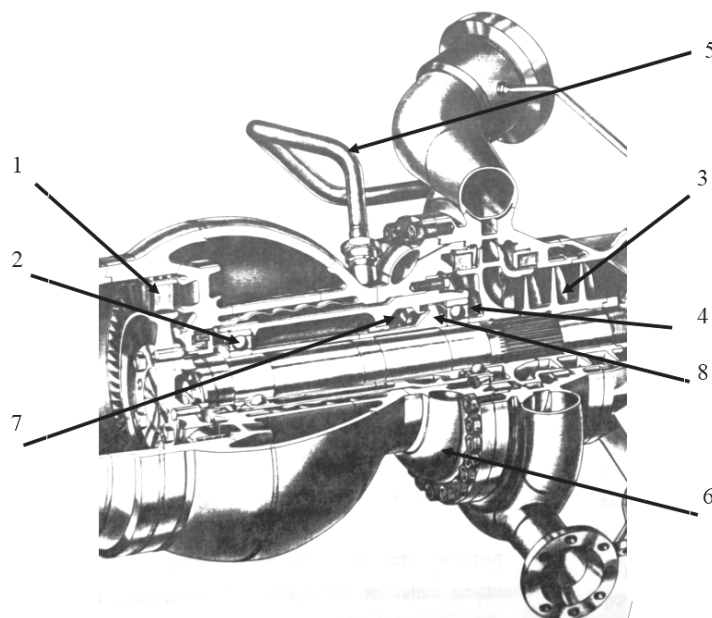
The construction of TPA LRE RD-120: 1 – turbine; 2 – angular contact bearing; 3 – oxidizer pump; 4 – angular bearing; 5 – inlet of oxidizer for cooling of bearings; 6 – inlet of oxidizer after cooling of bearings; 7 – ADD hub; 8 – ADD disk
